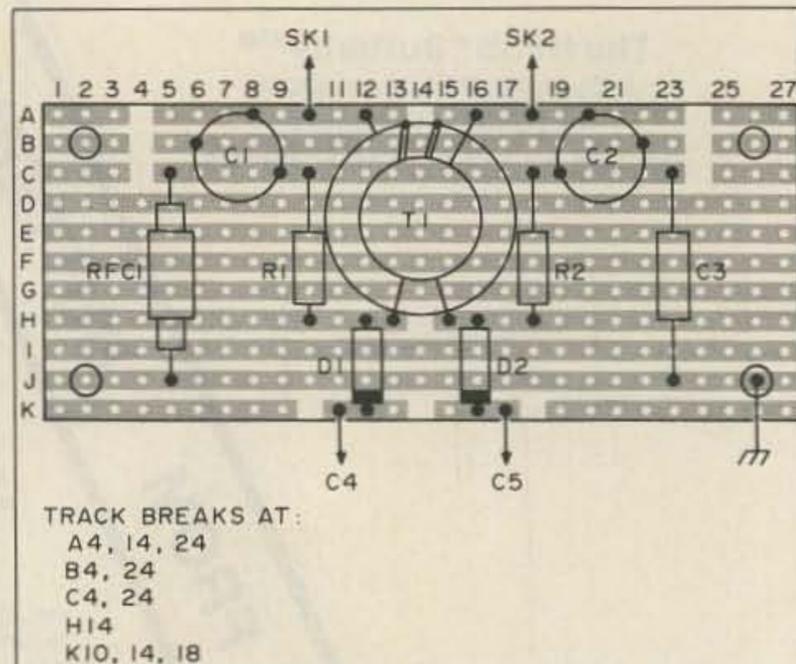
Component locations on the Veroboard. Drill the mounting holes very carefully to avoid damaging the board.
